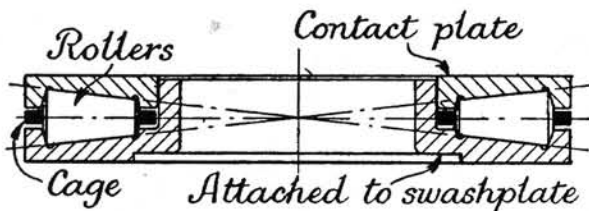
A form of roller thrust race suitable for heavy duty swashplate engine.
